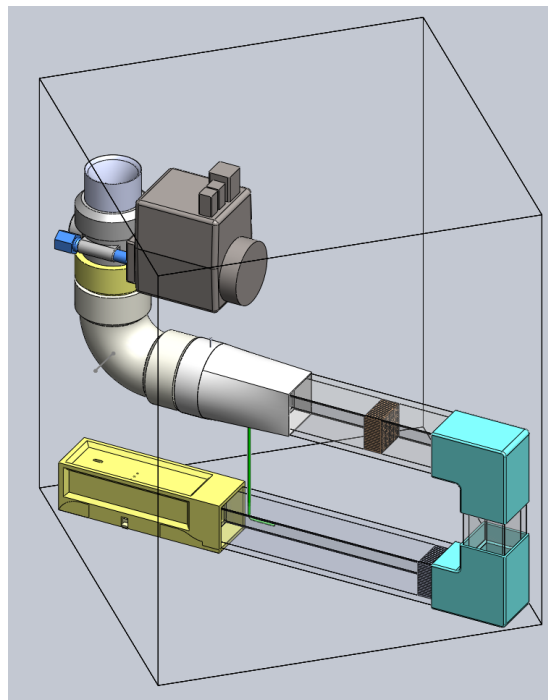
Detailed CAD Model of Wind Tunnel Design
